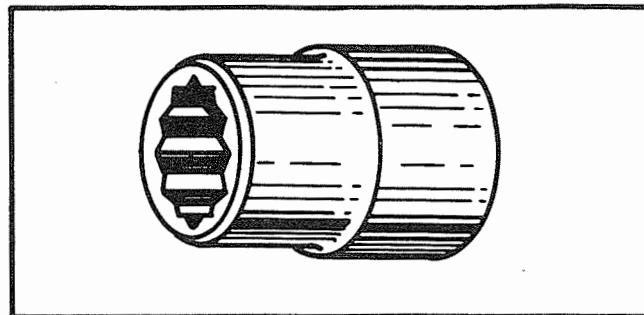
Oil Pressure Relief Valve Cap Wrench
